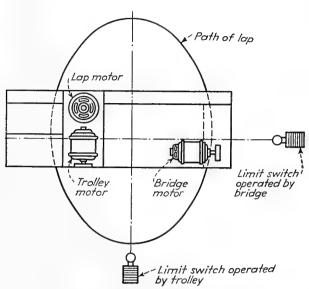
In a machine for polishing telescope mirrors, an elliptical motion of the polishing lap is sometimes required. Controls are arranged to reverse bridge motor at center of trolley motion and to reverse trolley motor at center of bridge motion.
